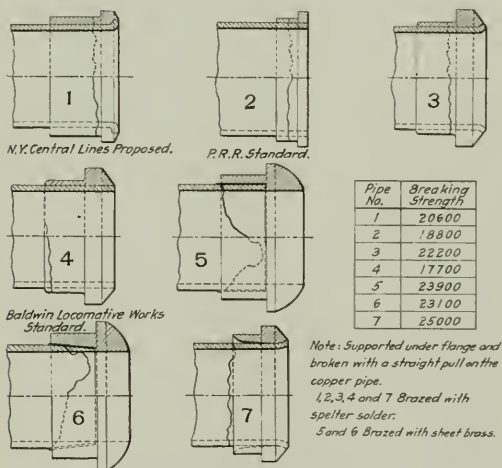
Tests Made on Injector Steam Pipe Fittings by the Baldwin Locomotive Works
